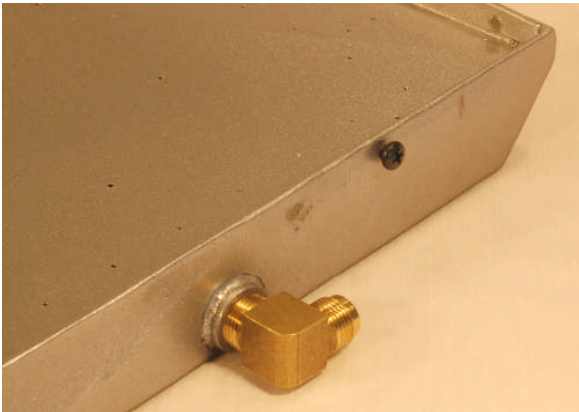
PILOT MOUNTING SCREW LOCATION
